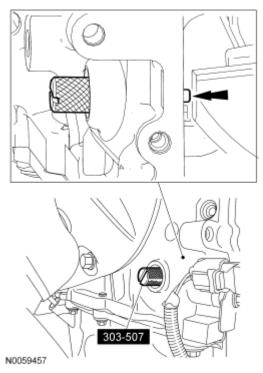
Identifying Special Tool (303-507) Courtesy of FORD MOTOR CO.
